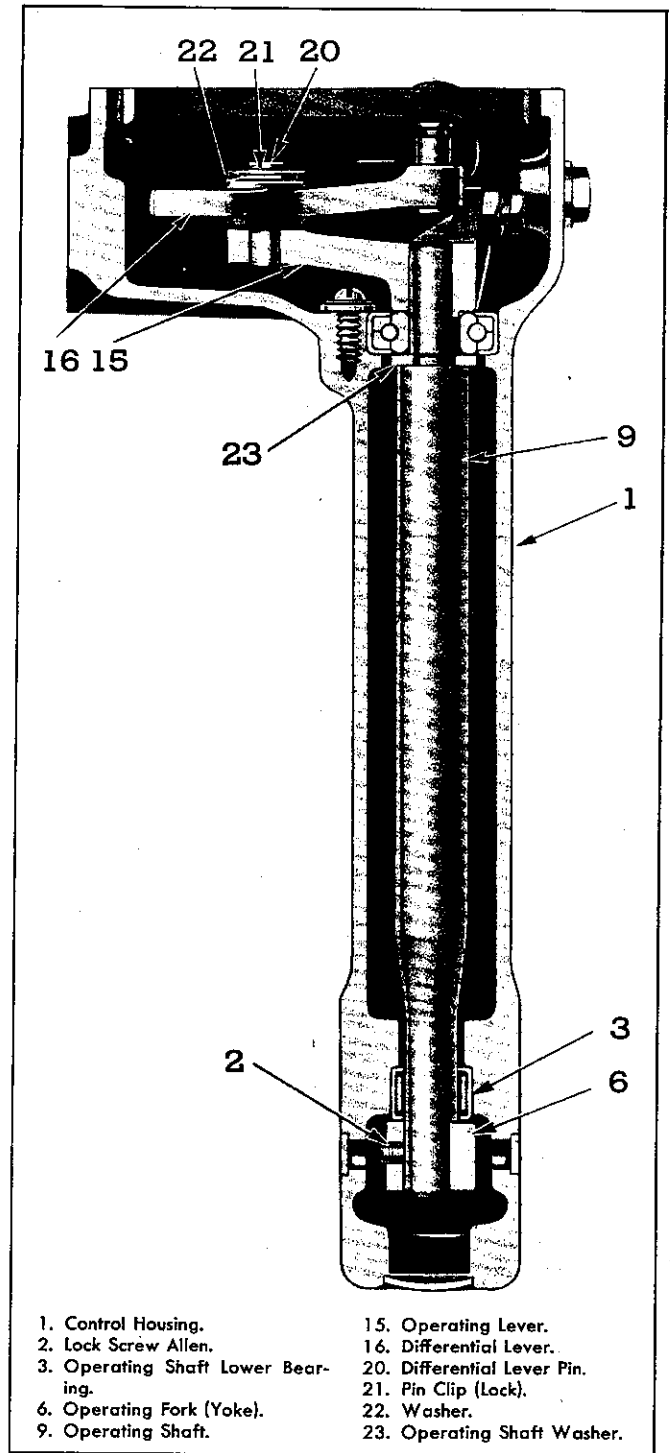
Governor Control Housing, Including Control Mechanism. ("Delco" and Late "Handy" Models)
